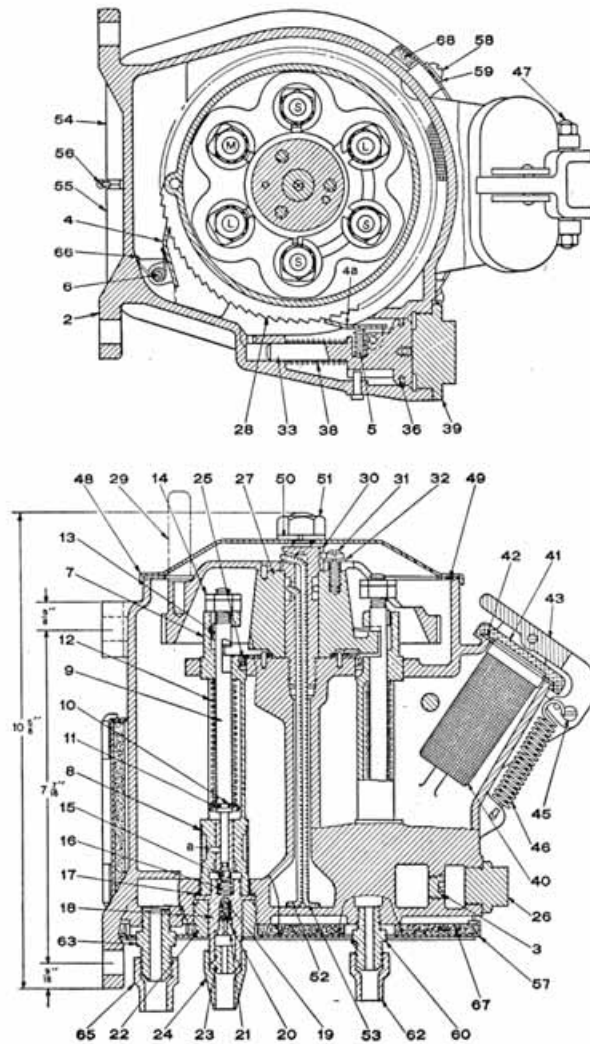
Sectional Assembly Views of the "F-1-A" Lubricator
